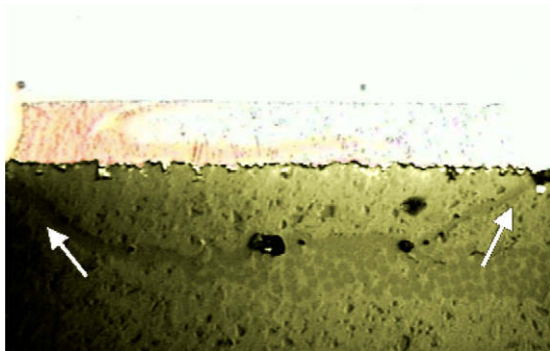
Cracked resin under the board side pad (dark line), edge-bonded.
